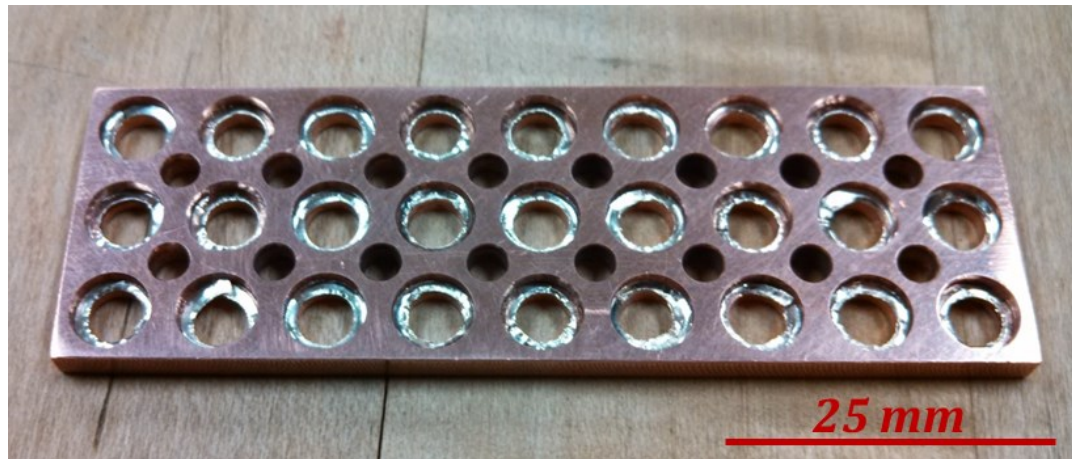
Lower plate of the distributed impinging flow copper tube structure with the 0.0018" thick foils of silver-eutectic braze inserted into the counterbores.
